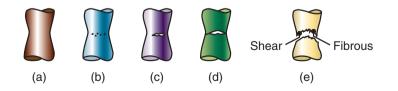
Sequence of events in the necking and fracture of a tensile-test specimen: (a) early stage of necking; (b) small voids begin to form within the necked region; (c) voids coalesce, producing an internal crack; (d) the rest of the cross section begins to fail at the periphery, by shearing; (e) the final fracture, known as a cup- (top fracture surface) and-cone- (bottom surface) fracture, surfaces.
